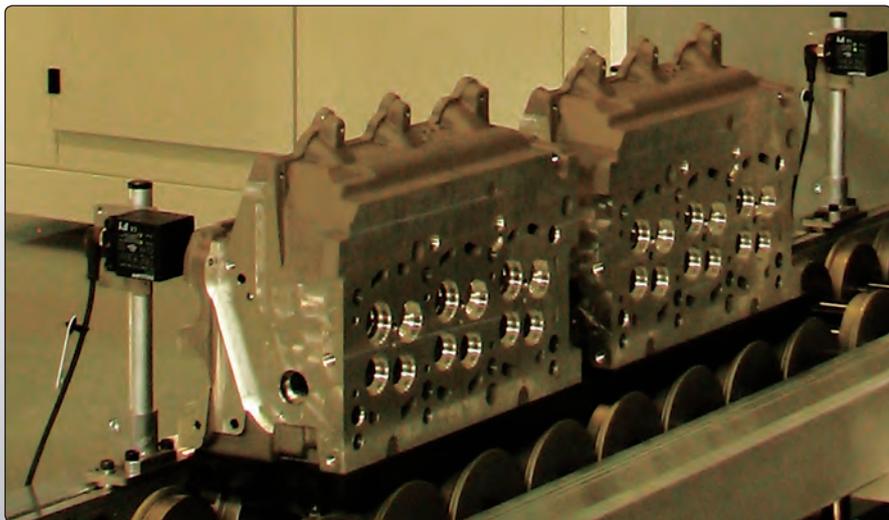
Part of the internal combustion engine located on the carrying plate [Grob]
